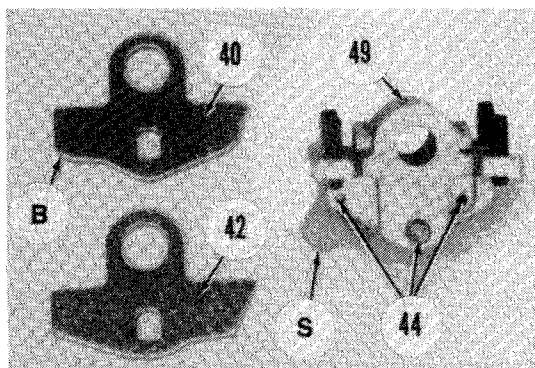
Regular cam (40) can be identified by beveled corner (B) while float cam (42) has a sharper corner.
